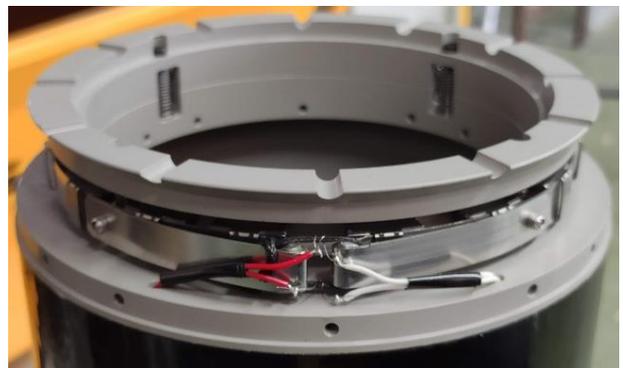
Redundant burn wire release system assembled on the uncoupled mechanism.
